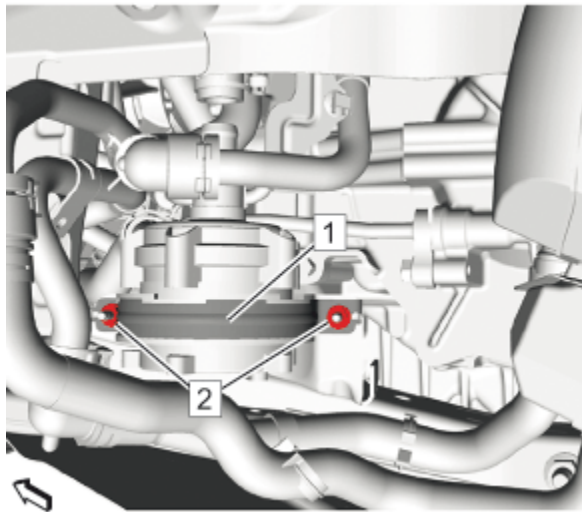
Generator Control Module Coolant Pump Bracket And Nuts
